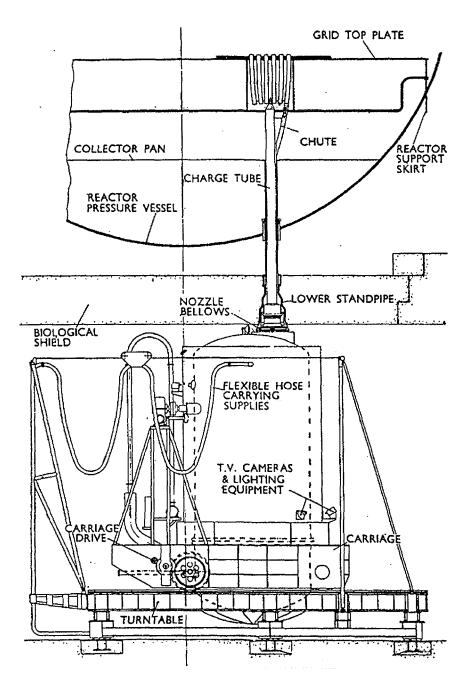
Arrangement of bottom-charging machine for Hunterston.
